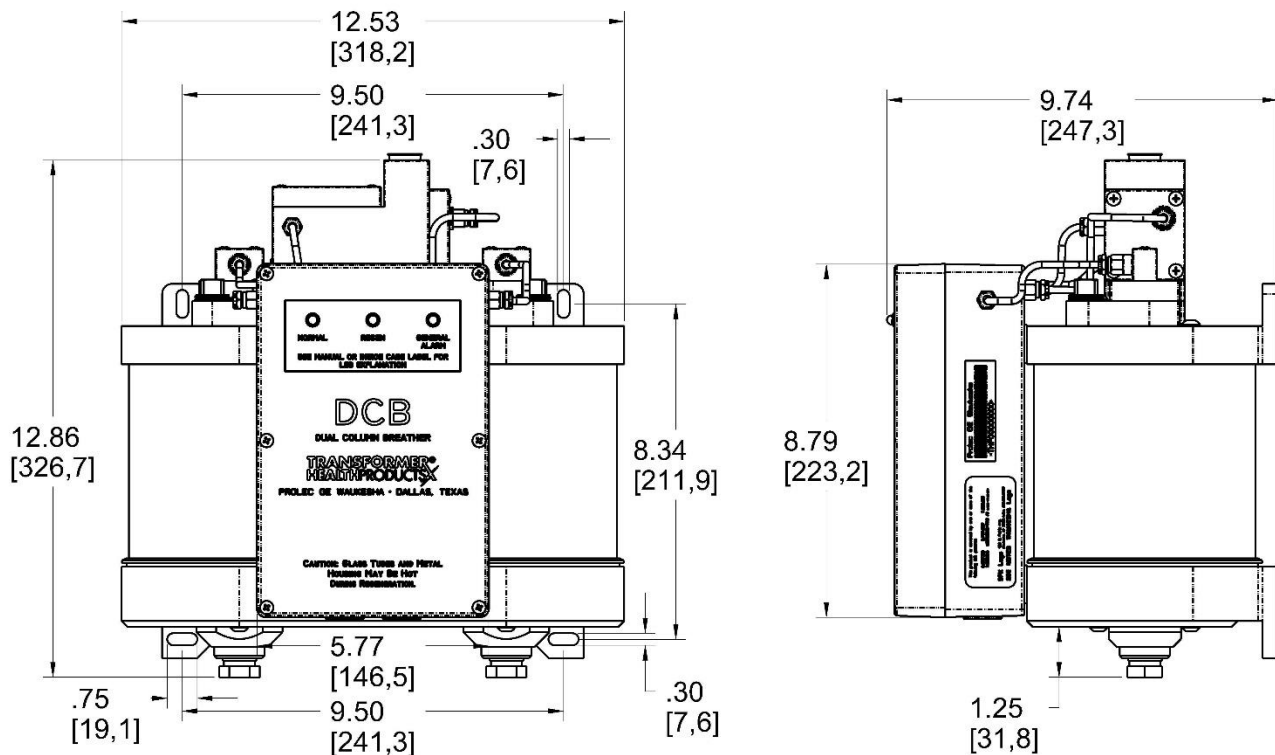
DCB Mounting Dimensions, Inches [mm]
